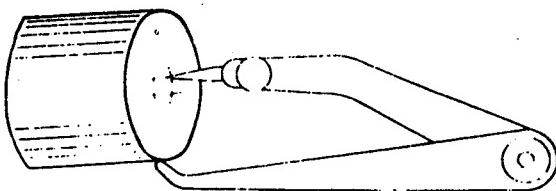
Centring a Shaft with Hermaphrodite Caliper
